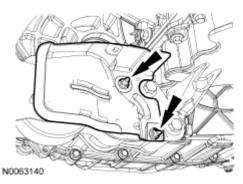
Locating Exhaust Flexible Pipe, Y-Pipe & Nuts Courtesy of FORD MOTOR CO.
